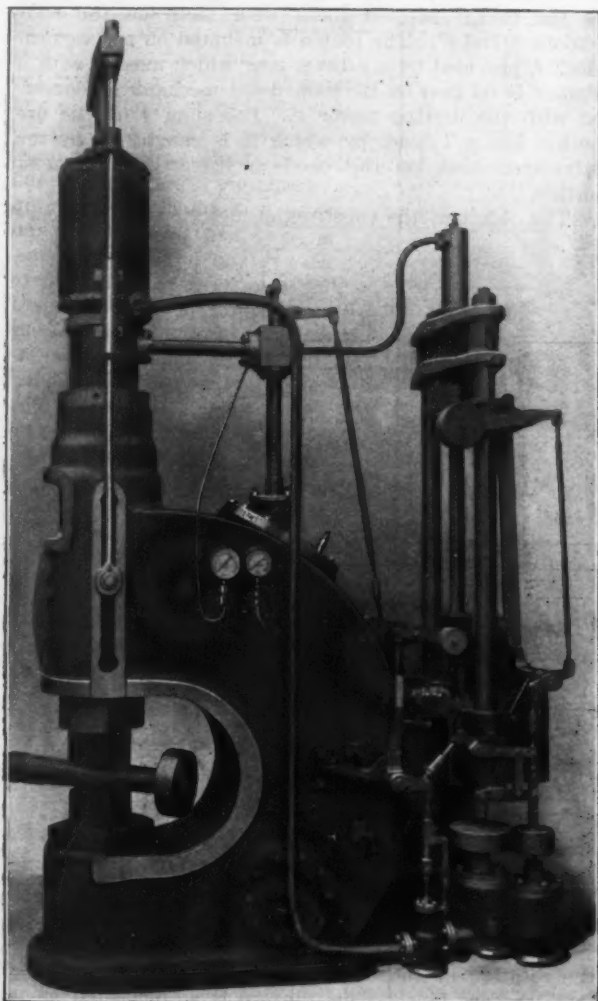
Rapid Action Steam-Hydraulic Forging Press, Single Frame Type.
